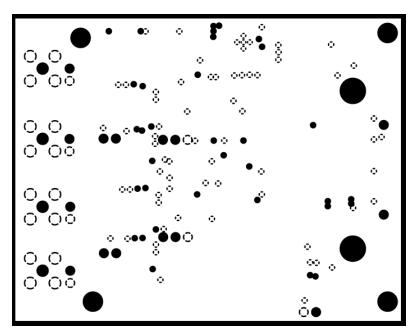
ADS8353-Q1EVM PCB Layer 2: GND Plane
